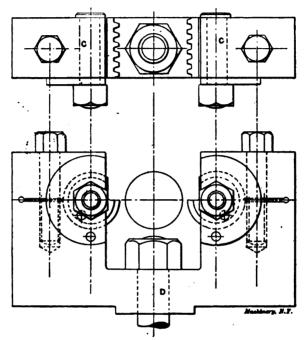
Double Tool-Post with Circular Formed Thread-Tool.
